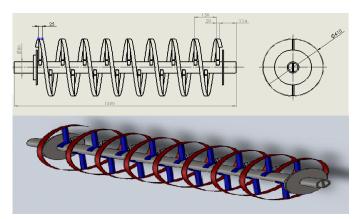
Flight stage 2 – Thin flight weldment
